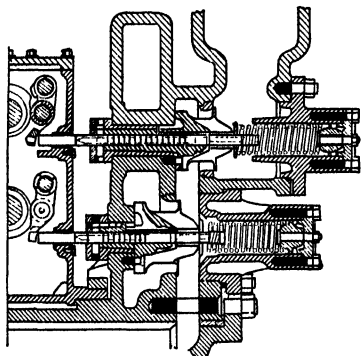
Poppet valves and related parts in cylinder. (Courtesy of Franklin Railway Supply Co.)
